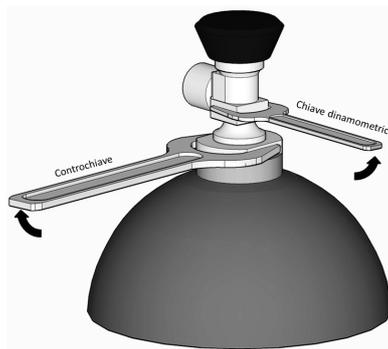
Use of the counter wrench to assemble/dismantle the valve
